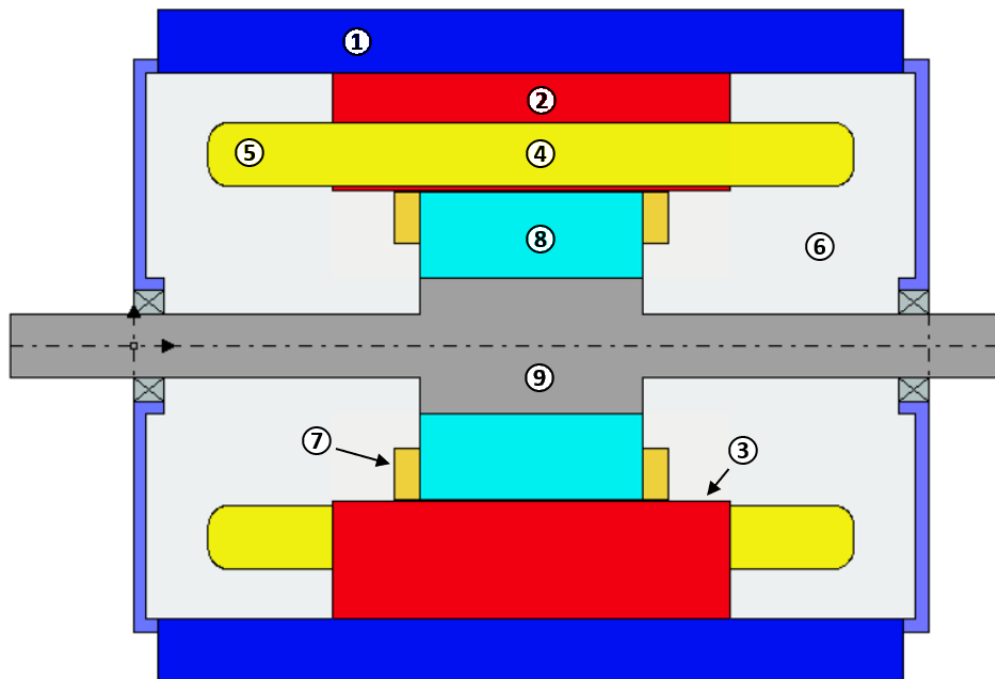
Main parts of an induction motor. 1. Frame, 2. Stator iron, 3. Stator tooth, 4. Stator winding, 5. Stator end winding, 6. Motor end space, 7. Rotor winding, 8. Rotor iron, 9. Shaft (*own source*).
